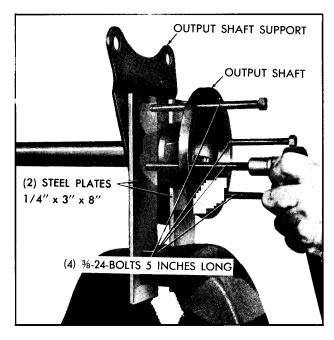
Removing Right Outer Shaft Support And Bearing
